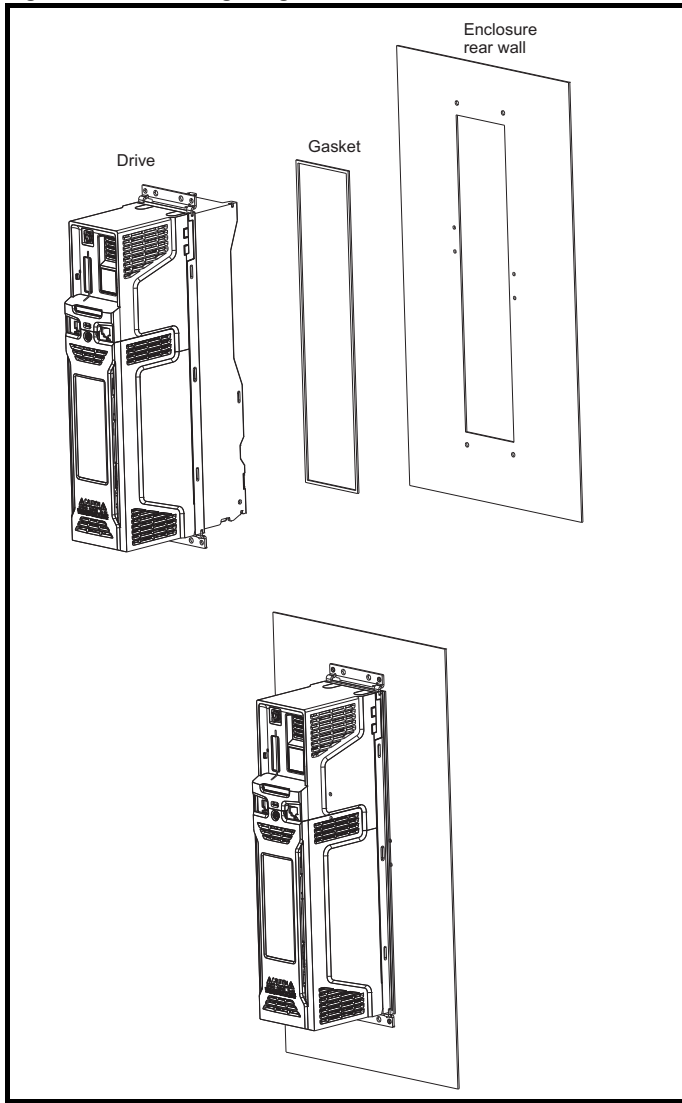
Example of IP65 (NEMA 12) through-panel layout
